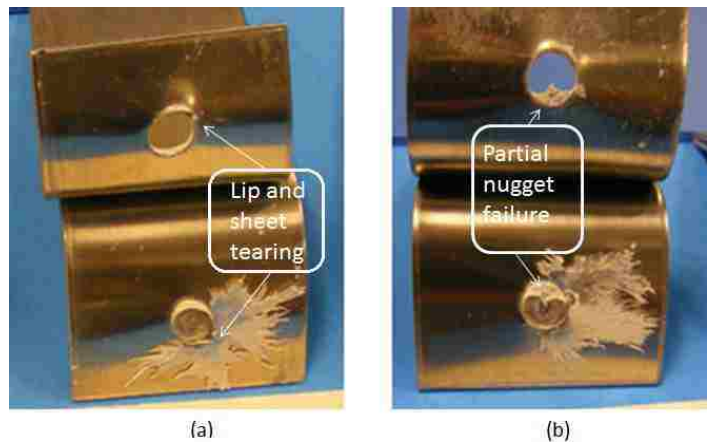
(a) Integer nugget showing a lip; (b) partially fracture nugget.
